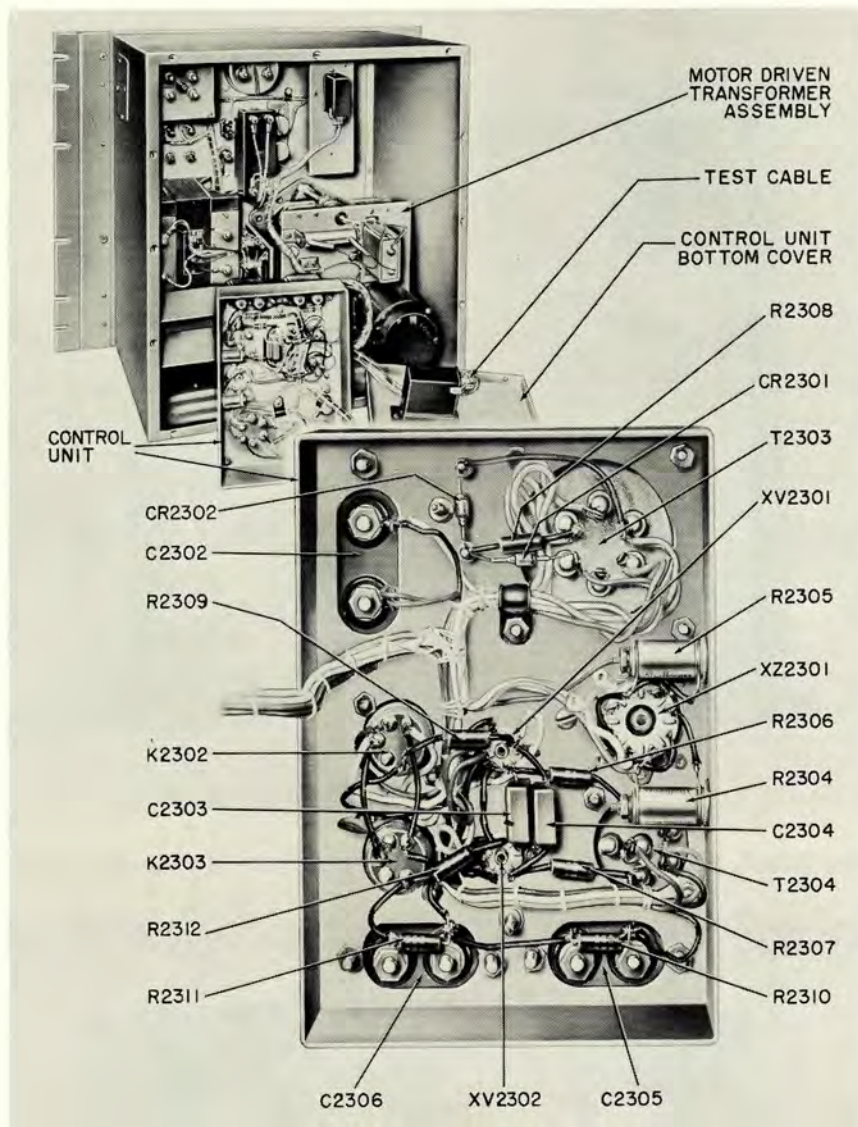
Power Supply Type PP-958/FPN-30, Bottom View of Components
